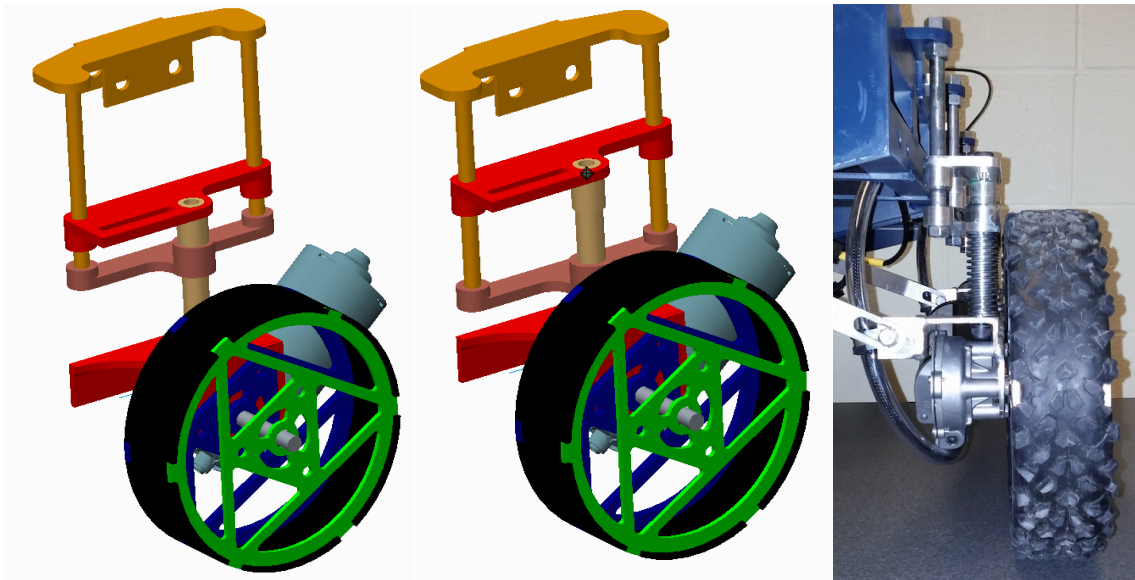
Suspension Assembly Static (Left), Fully Displaced (Center), and Front View (Right)
